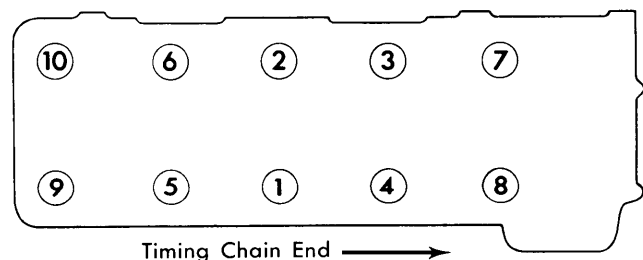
Cylinder Head Tightening Sequence (Loosen in Reverse Order)
